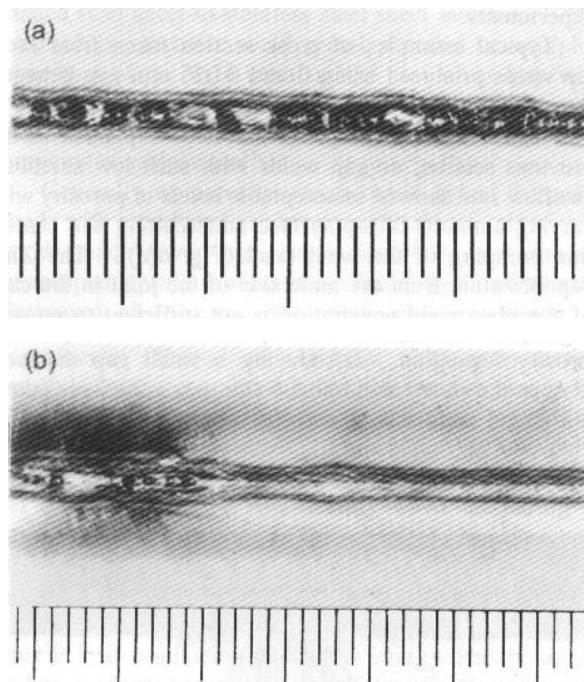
Macrographs of laser welds produced using (a) argon and (b) helium as a shielding gas with 15 l/min flow rate.
